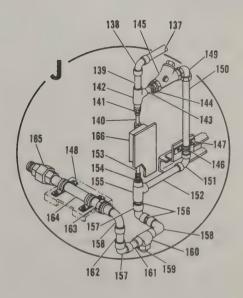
Plumbing Assembly (Sheet 2 of 3)
